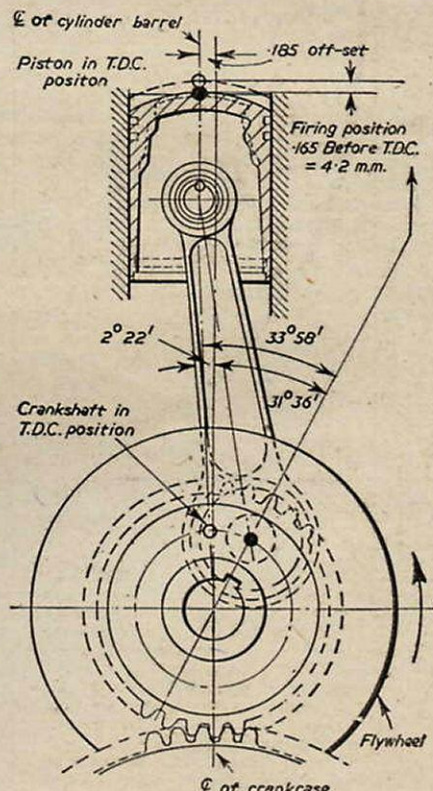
The drawing above shows the setting for the correct ignition timing and also the timing of the rotor gear.
